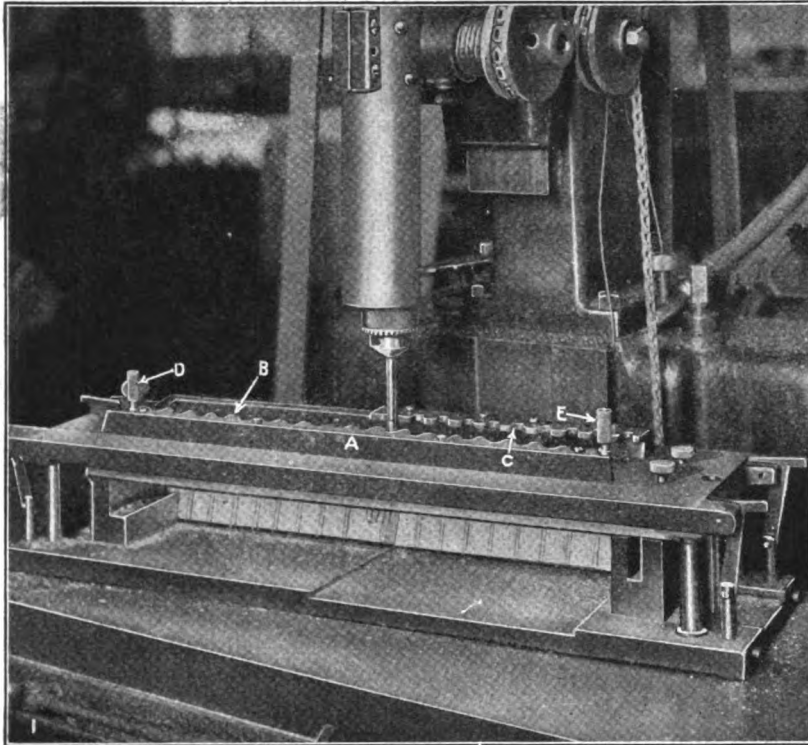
MILLING WINDOWS IN COVER. FIG. 2—DRILLING THE END HOLES
